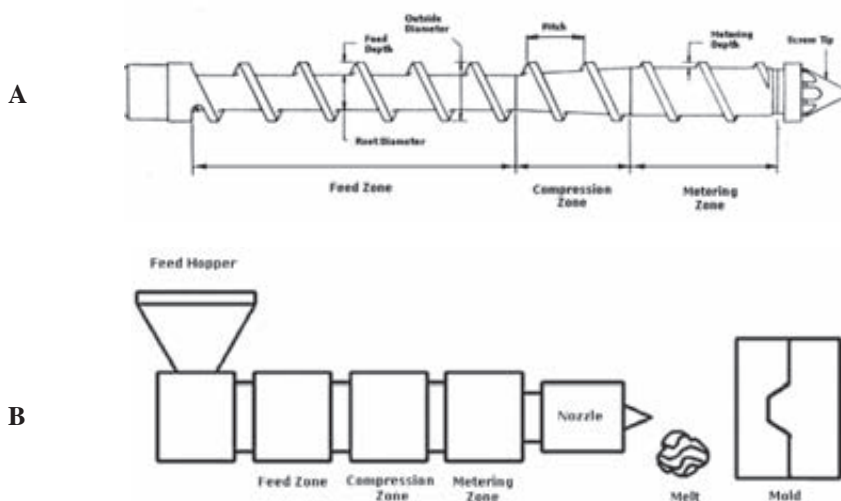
(a) Schematic drawing of a screw profile (b) typical injection molding machine (b).
